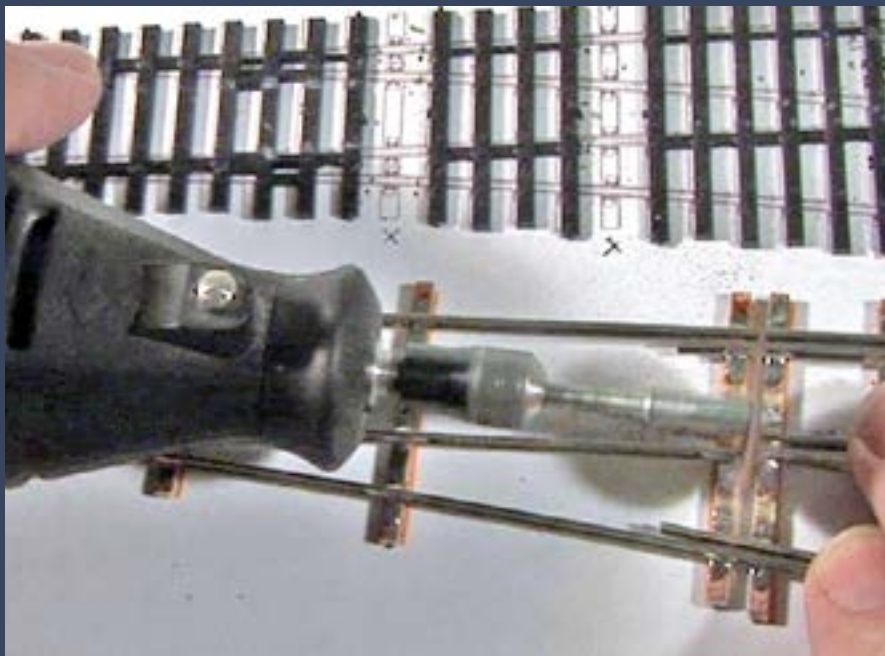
I use a motor tool set on slow speed, with a double-thickness cutoff disk. I carefully cut through the rails between the double ties on the back end of the frog.
